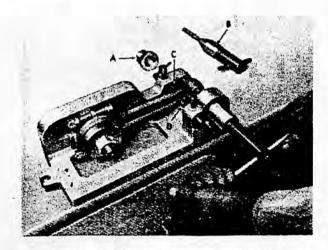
REAMING GUDGEON PIN BUSH. FIXTURE 6200A WITH REAMER SET MF6200AD
